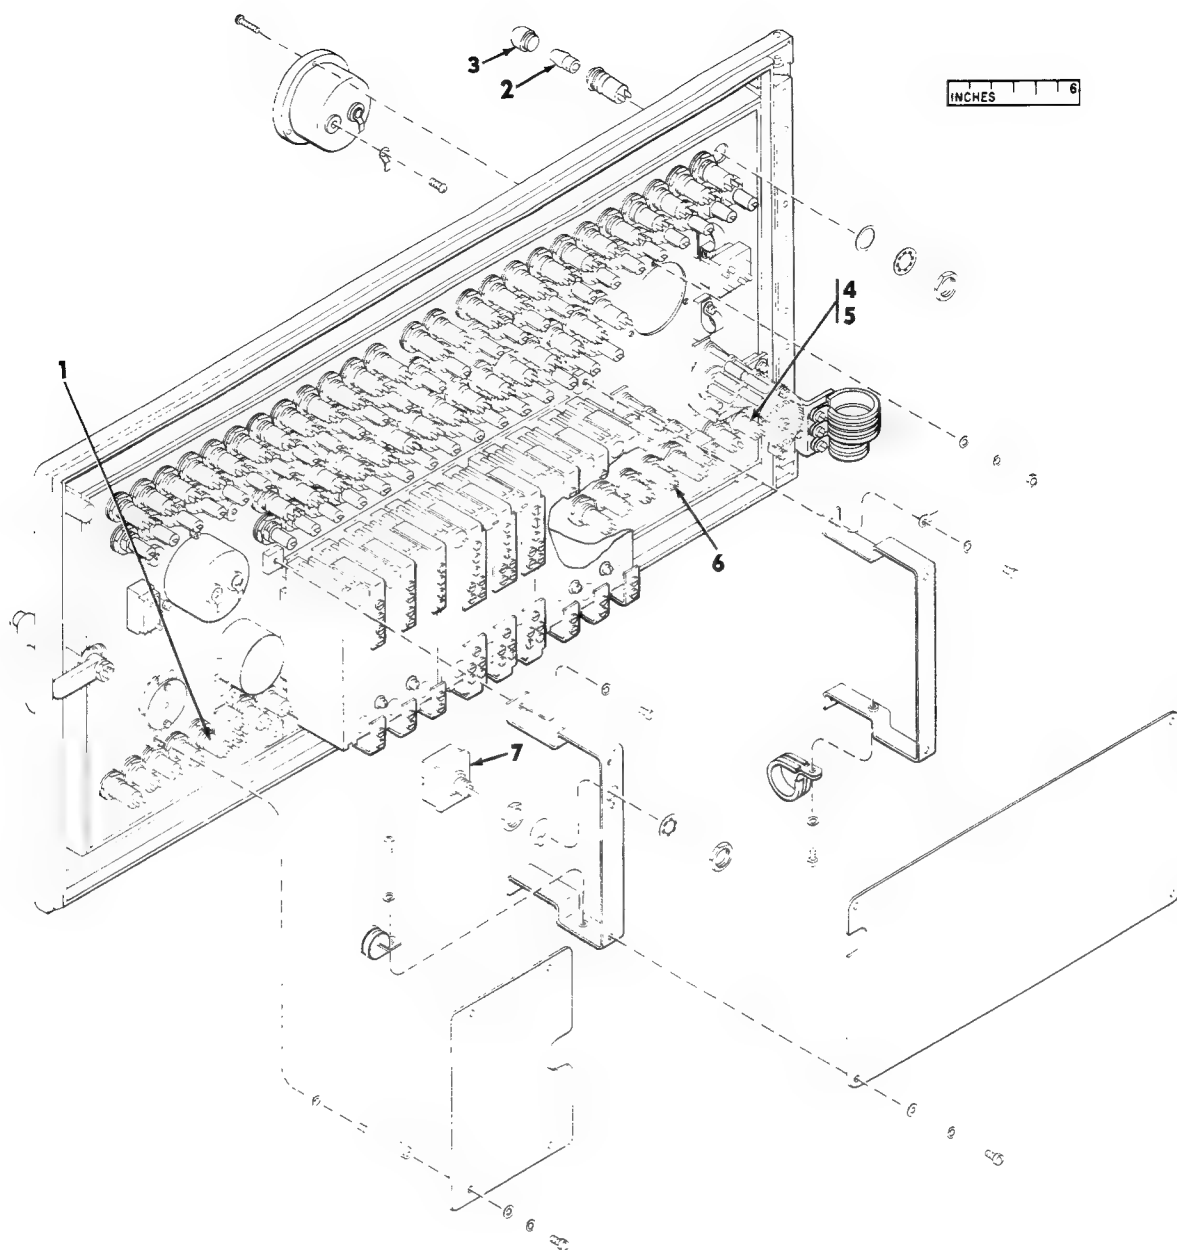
Power supply PP-1178/M (7621591)—exploded view
